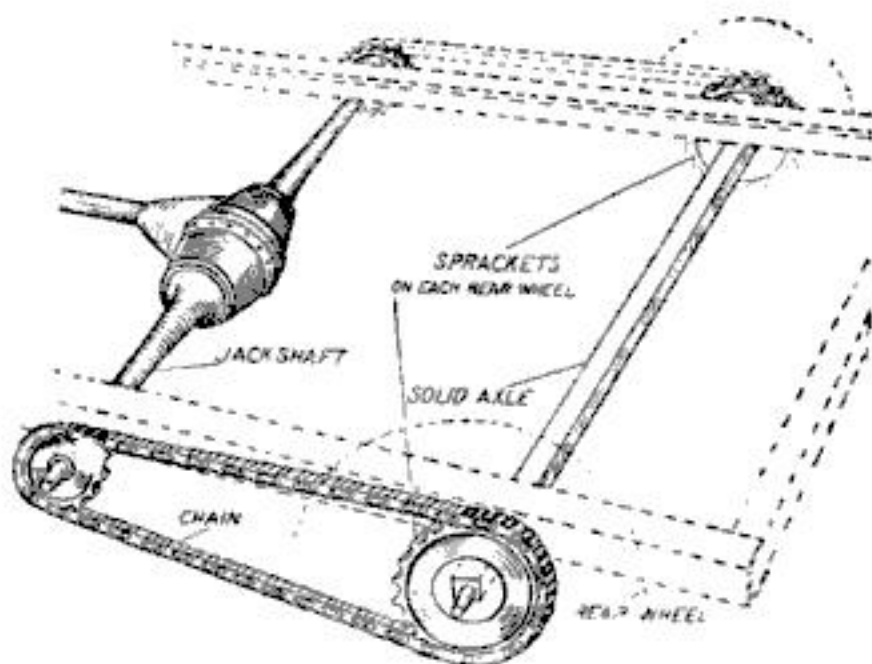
Double-chain drive. The motor-shaft ends in a jackshaft which transmits the power to sprockets connected by chains
